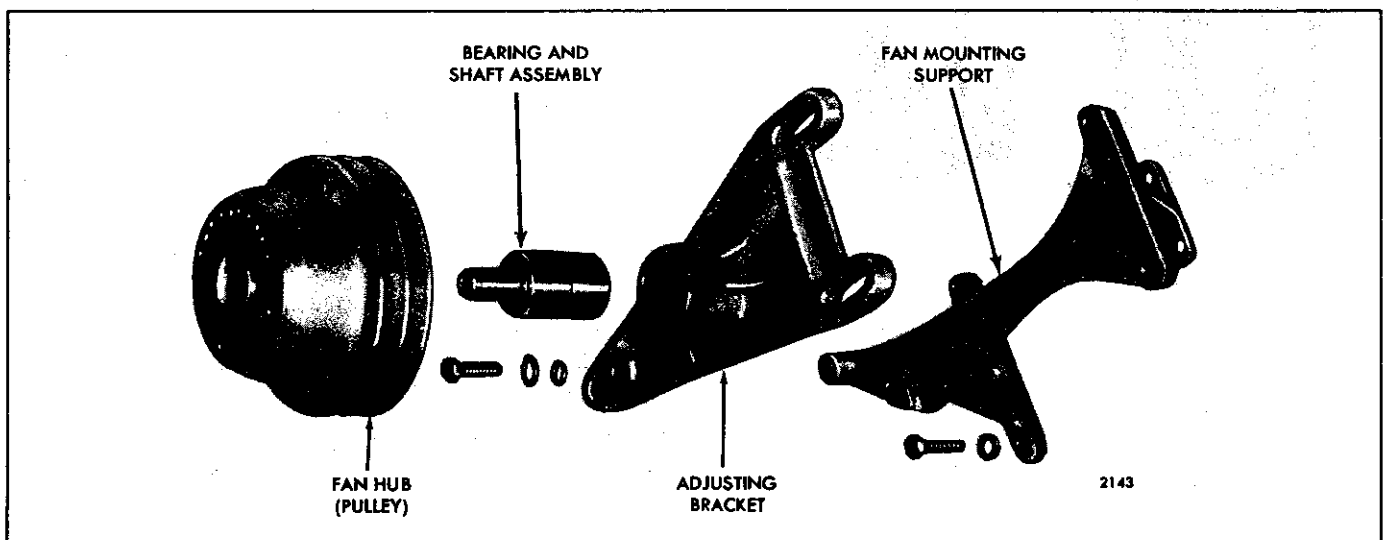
Typical Fan Hub and Adjusting Bracket Details and Relative Location of Parts (In-Line Engine)
